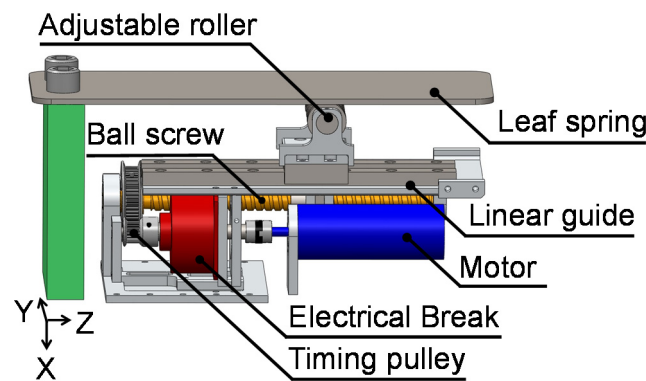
CAD model for the joint stiffness adjustment mechanism.
